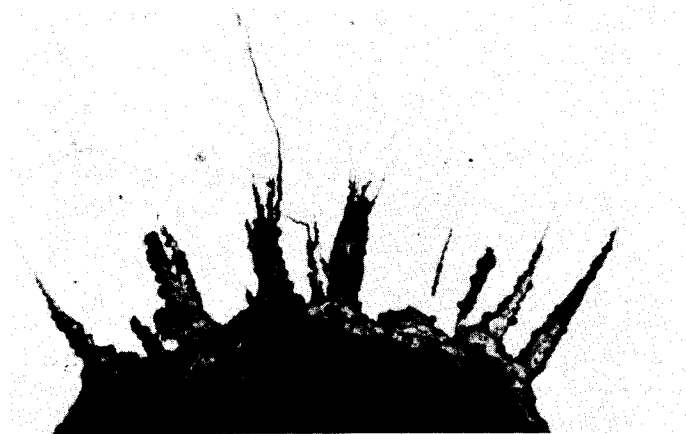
Multiple corrosion-fatigue cracking at a thread root in a large stud.
